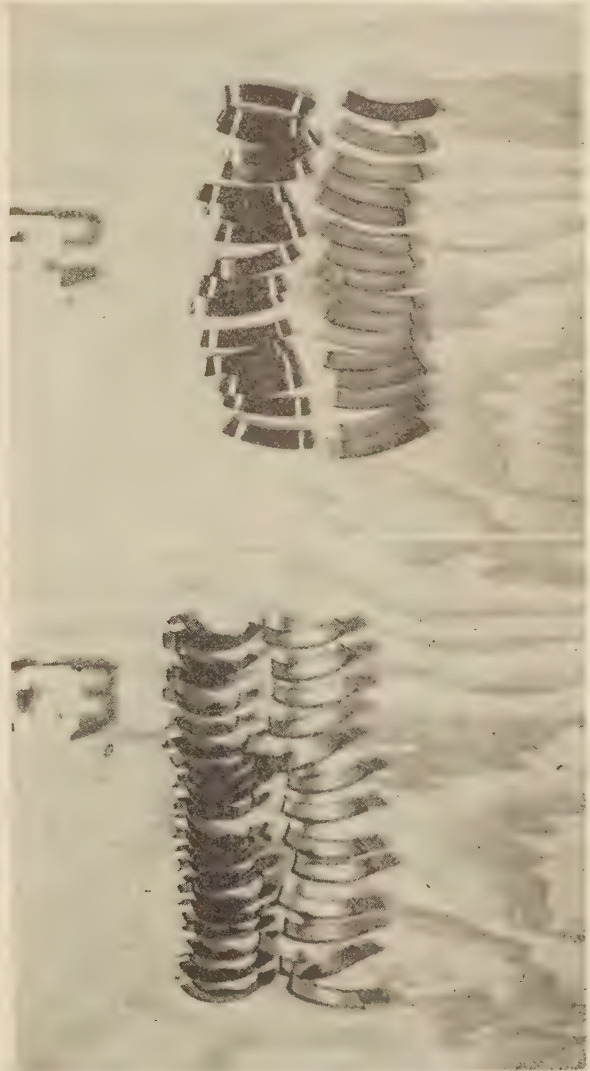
CHIPS FROM S.A.E. 1020 PRODUCED AT 523 FPM CUTTING SPEED WITH FEED OF 0.0105 IN. PER TOOTH
